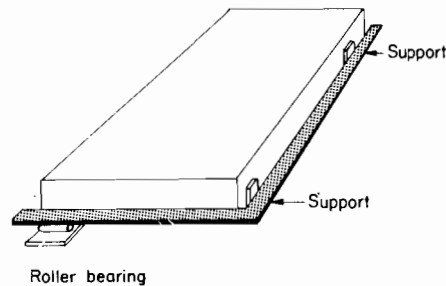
A large square used for angle control. To eliminate friction one of the legs is supported on a roller bearing.
